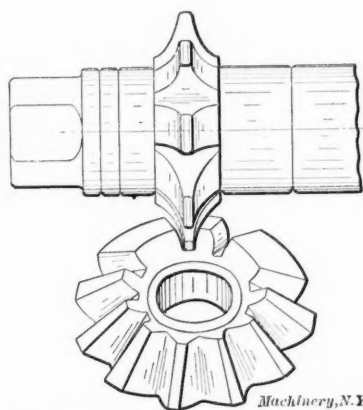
Shaping the Teeth of a Bevel Gear by the Formed Cutter Process.
